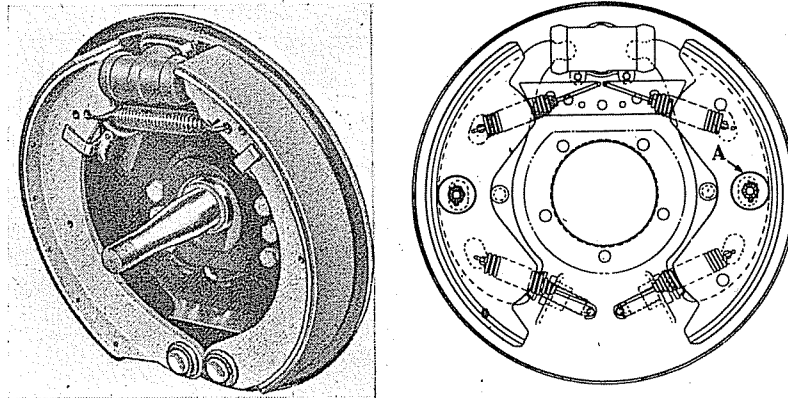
Typical Front and Rear Brake Assemblies — Models 2-26A, 2-33A.
